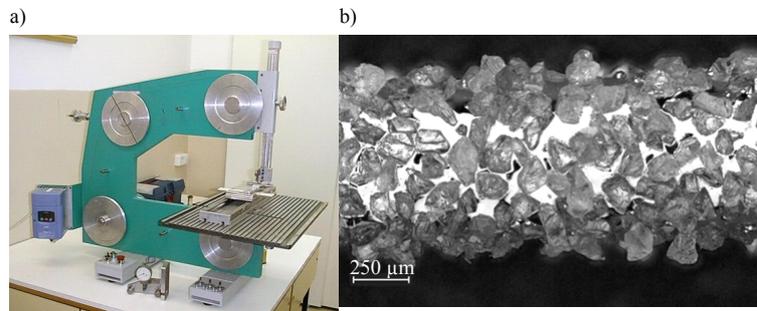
Research position and tool applied in examinations: a) general view of the cutting machine, b) view of the active surface of HK wire
